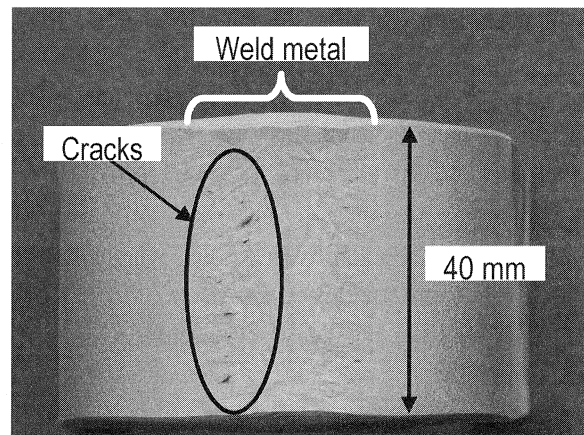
Cracks observed after a bending test of a specimen taken from the joint welded using DIN 1.4455 wire.
